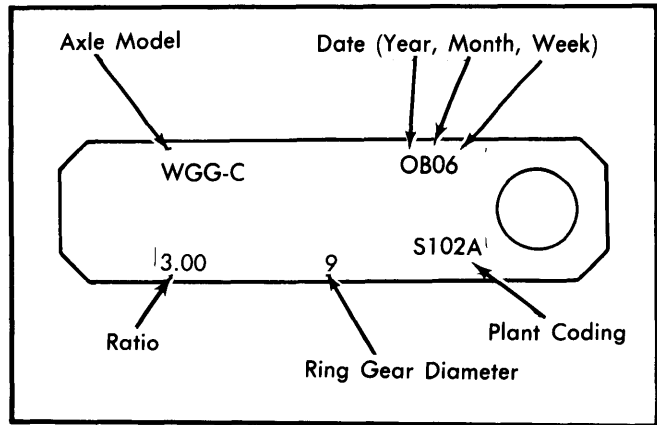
Ford Motor Co. Rear Axle Identification Tag
